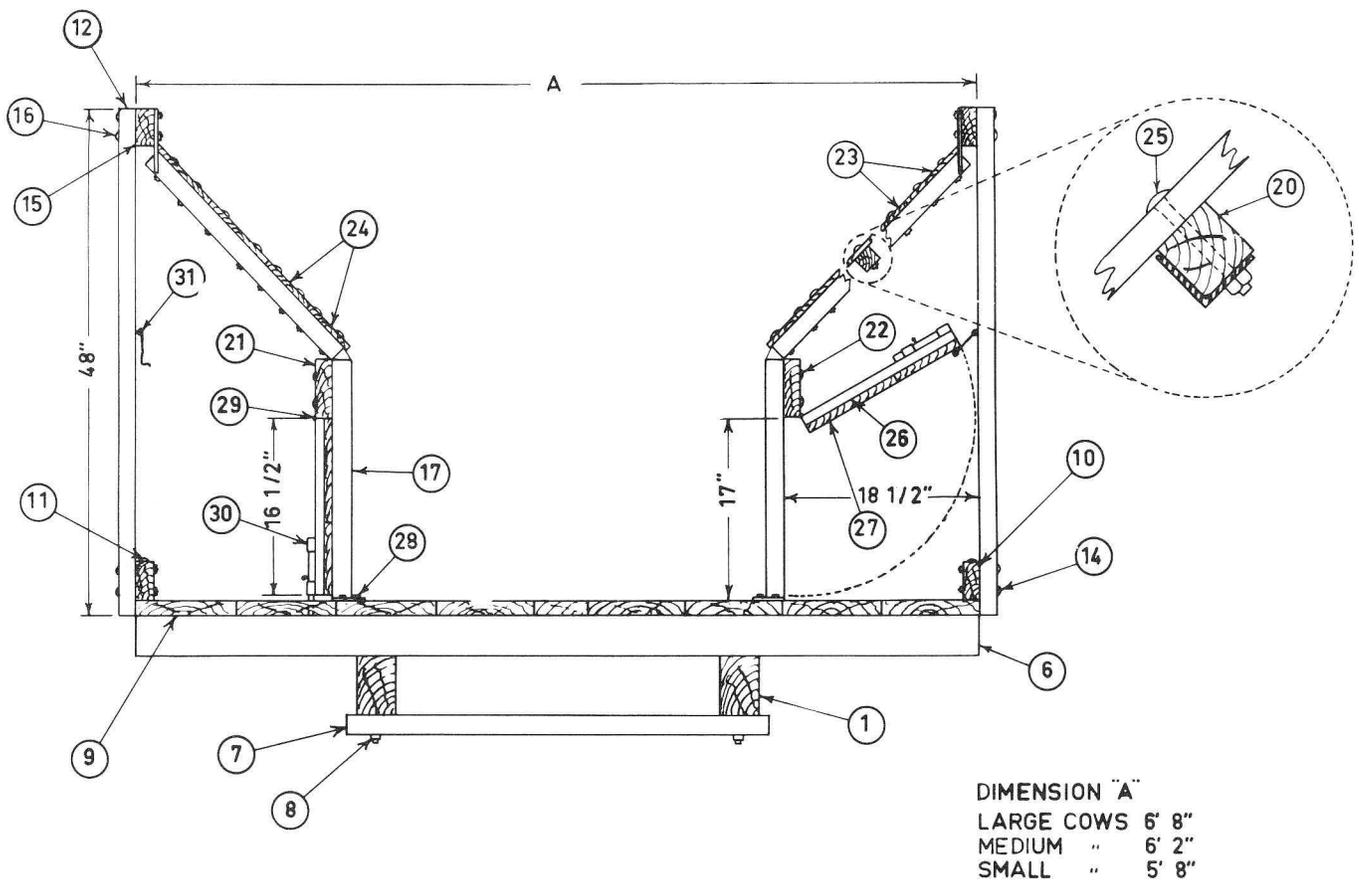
FLARING SIDES ON ANGLE BRACKETS Cut boards to length and bolt to the angle brackets using a 2 by 2 filler piece (20) at each bracket.
